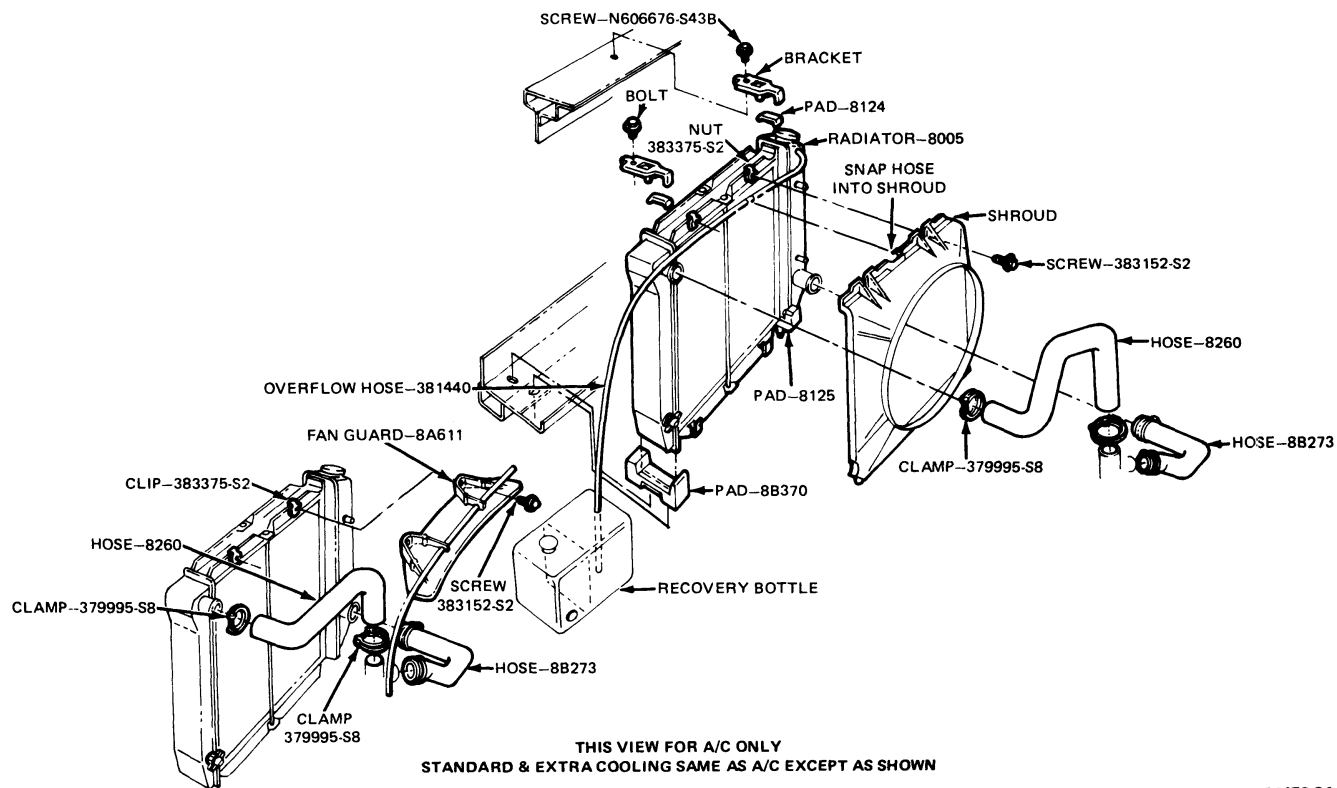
Radiator Installation—F-100—F-350 and Bronco—6 Cylinder
